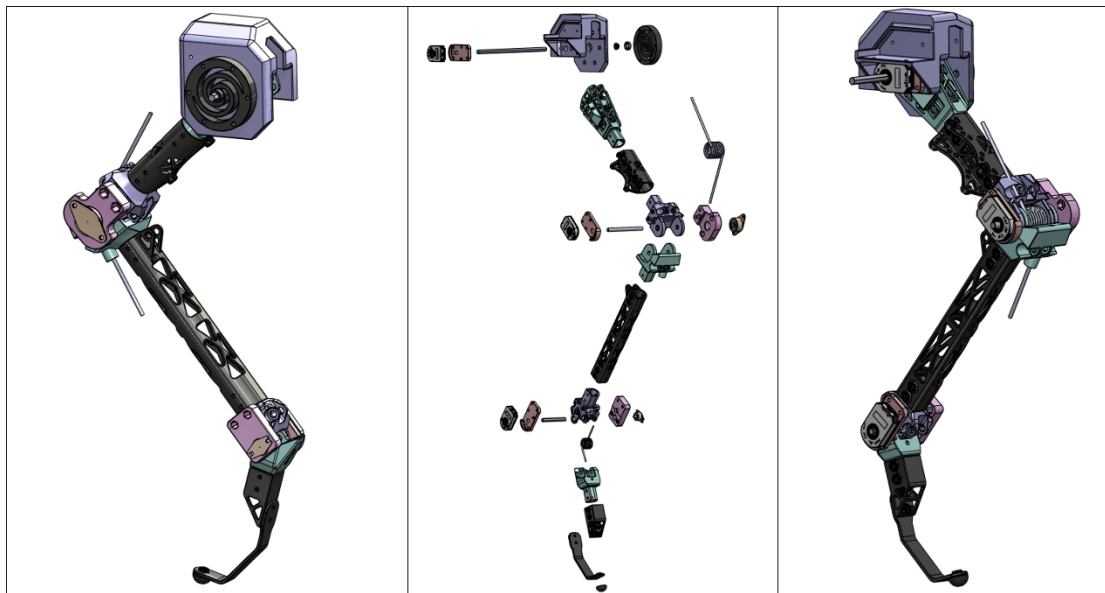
New quadruped robot hind leg with femur that allows for modular hip spring rate via 3D printed hip springs
